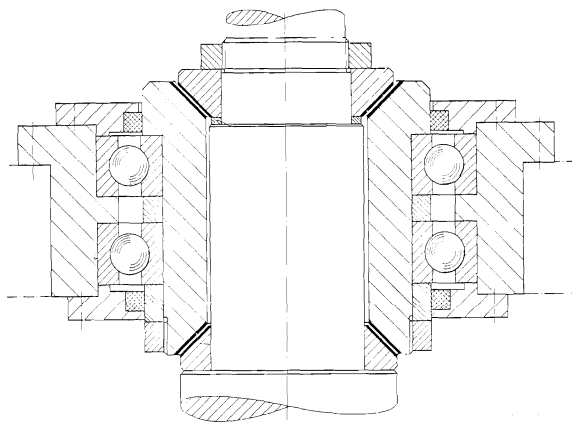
Retainer and centering bearing for vertically arranged rotors
